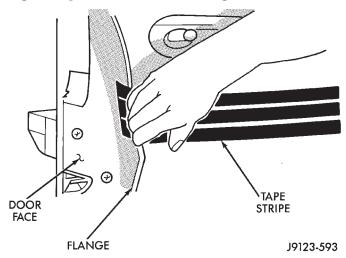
Tape Stripe/Decal Installation On Door Flange
